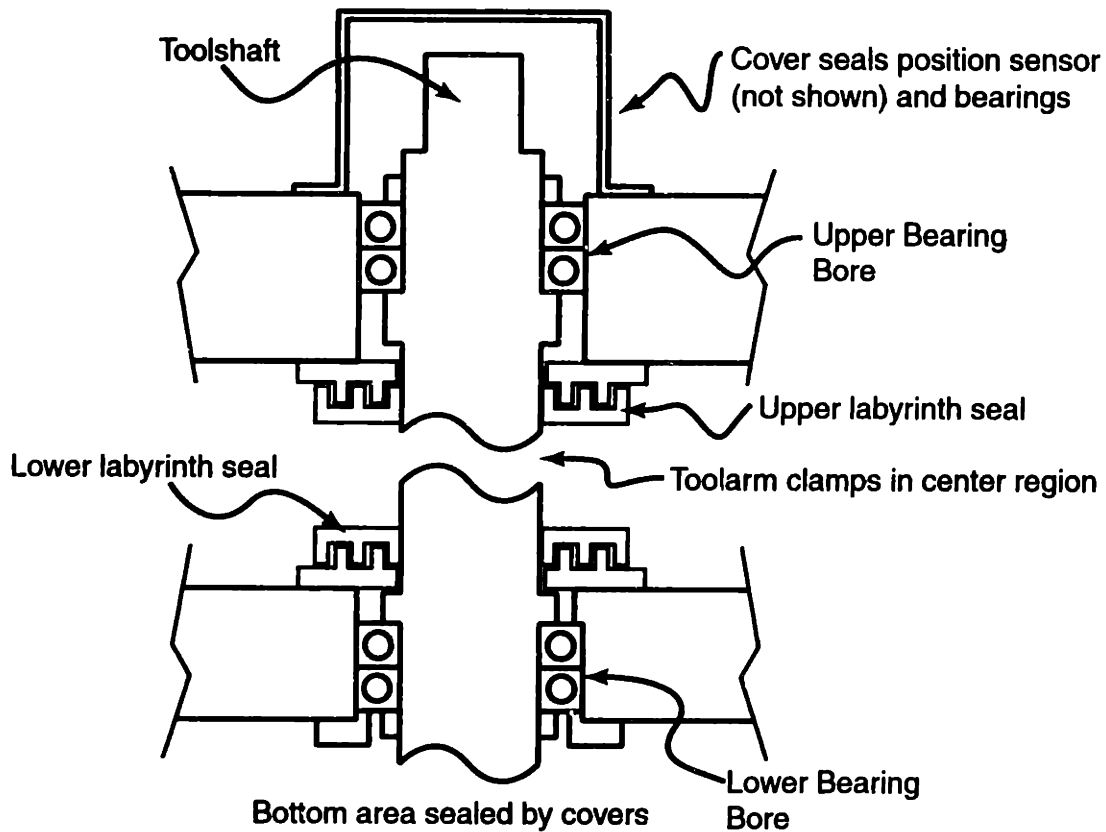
Bearing seal configuration in a cross-sectional view.
